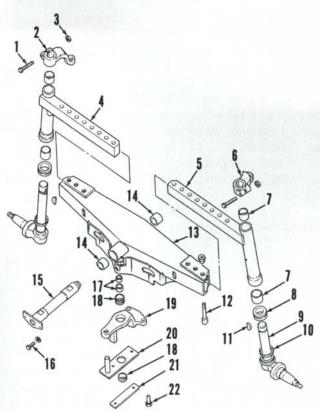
Exploded view of heavy duty straight adjustable front axle used on some tractors. Refer to Fig. 3 for legend.
